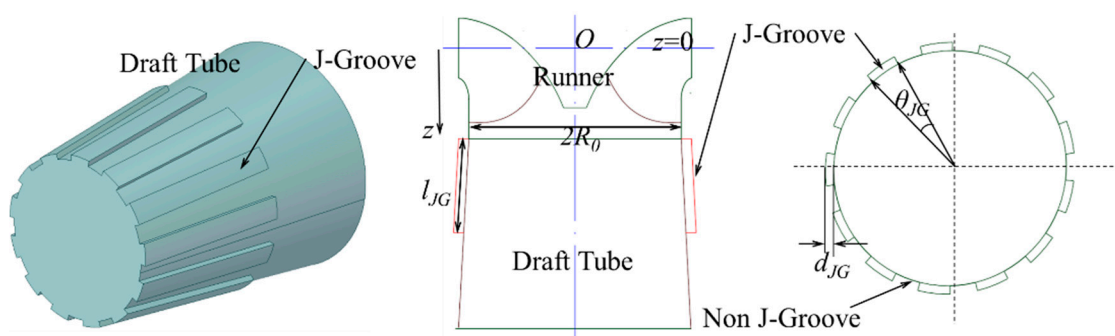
J-Groove shape install on the draft tube inner wall and design parameters.
